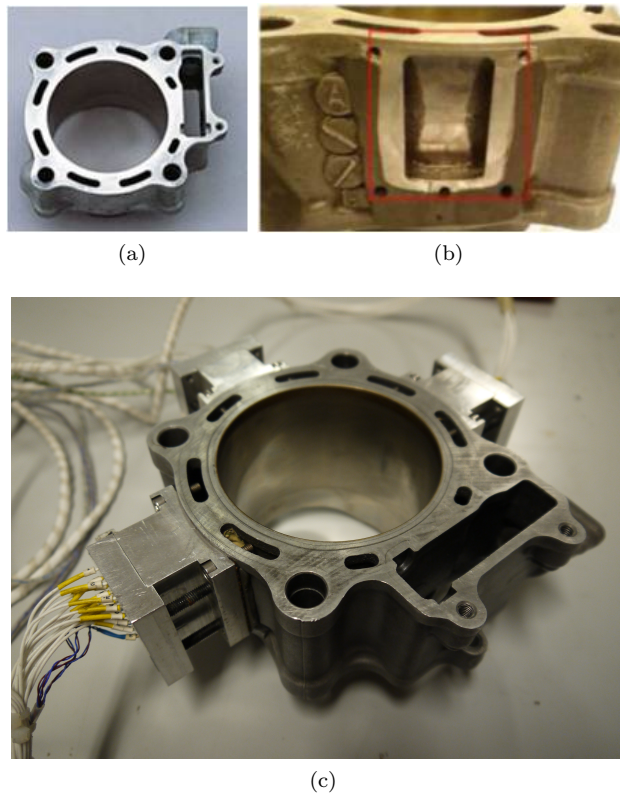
Photographs showing: (a) standard barrel (b) machined window (c) ultrasonically instrumented barrel.
